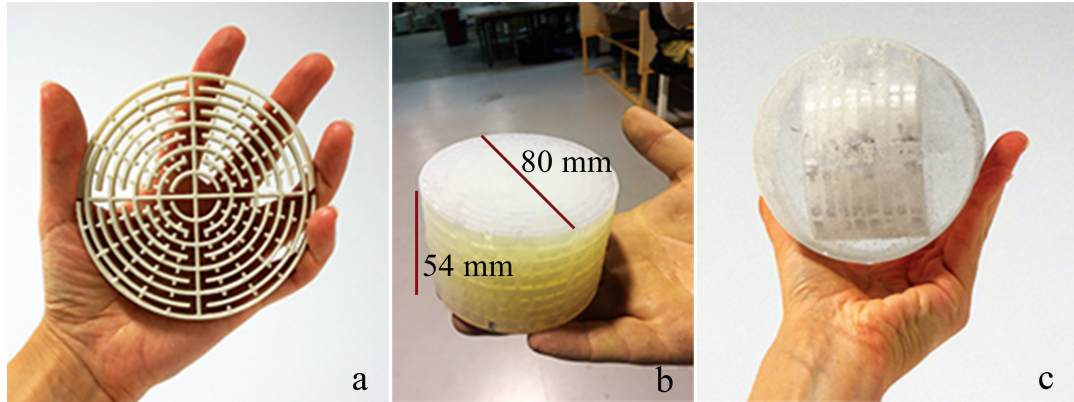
a) One typical layer of the printed inner structure, b) one manufactured unit combining eight layers in actual size, c) epoxy molded sample ready for measurement.
